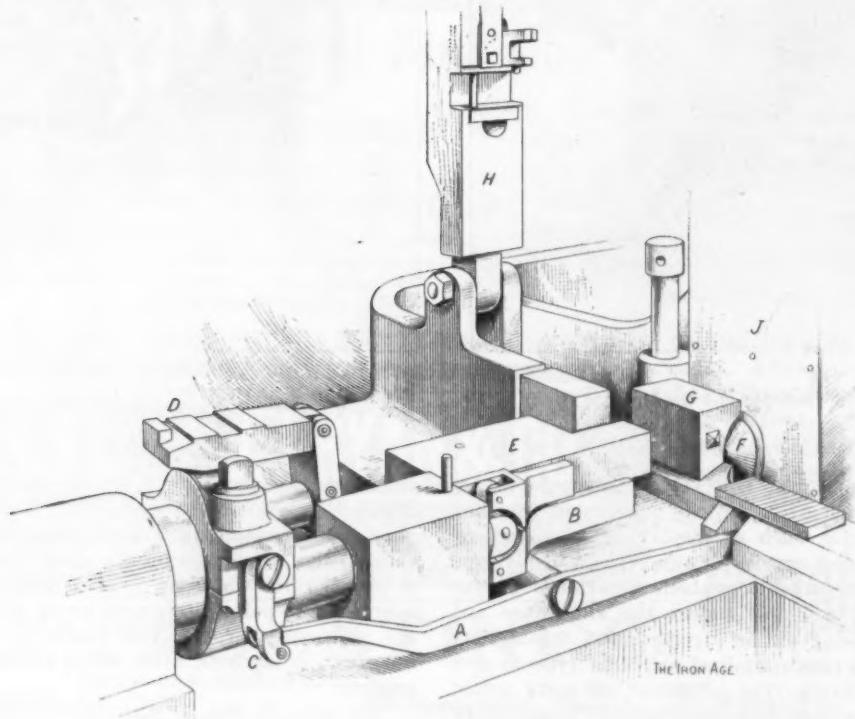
Perspective Showing the Parts Which Have to Do With the Actual Casting.
